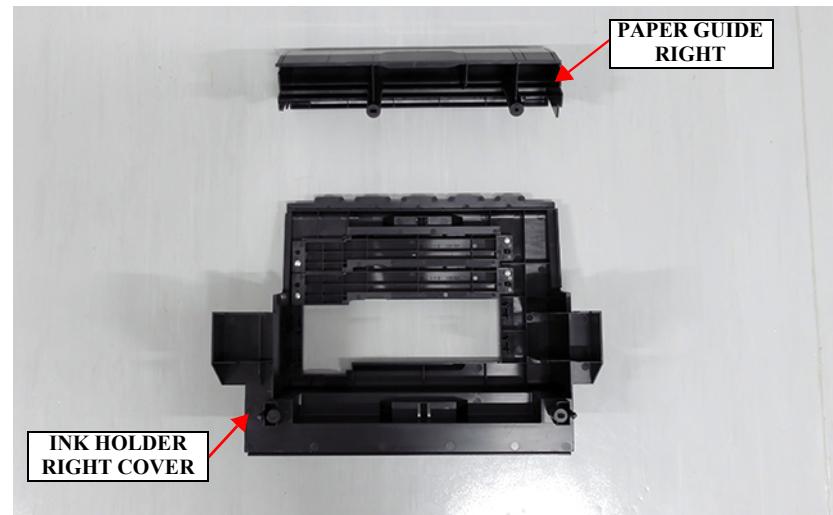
Removing the PAPER GUIDE RIGHT / INK HOLDER RIGHT COVER (3)
